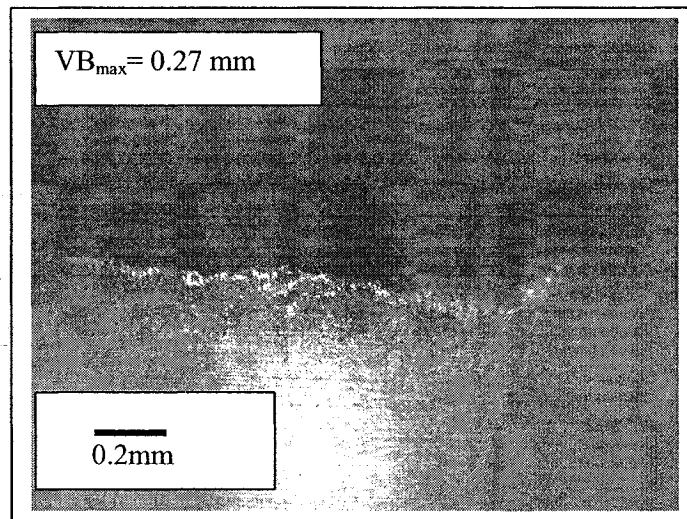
SMM micrograph of wear surface (Whisker ceramic tool, cutting speed = 550 m/min, feed= 0.03 mm/tooth)
